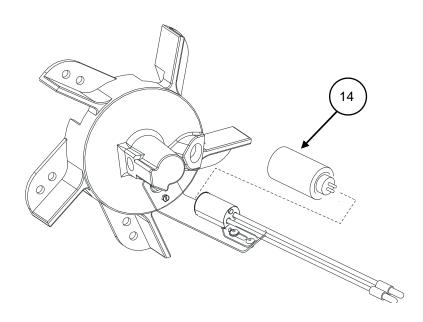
BURNER HEAD ASSEMBLY 53649
